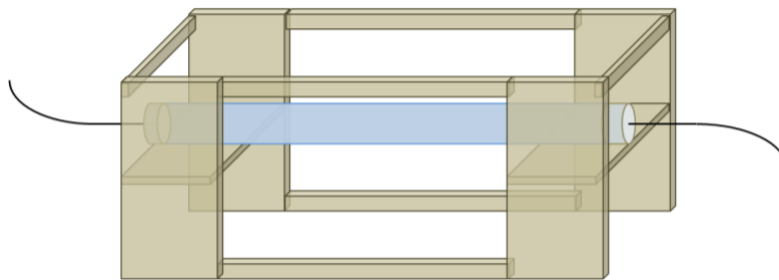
Packaging carbon tube on the sensor mounting frame structure.
